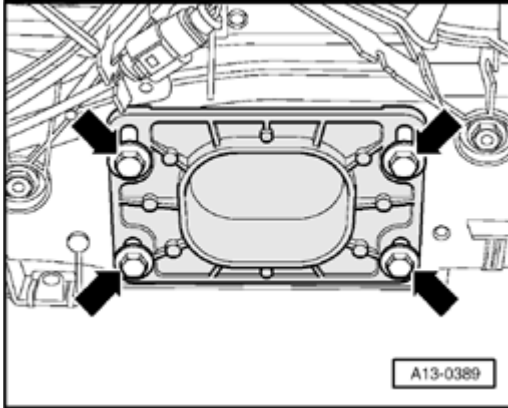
Bolt Lock Carrier To Longitudinal Member And To Fenders
